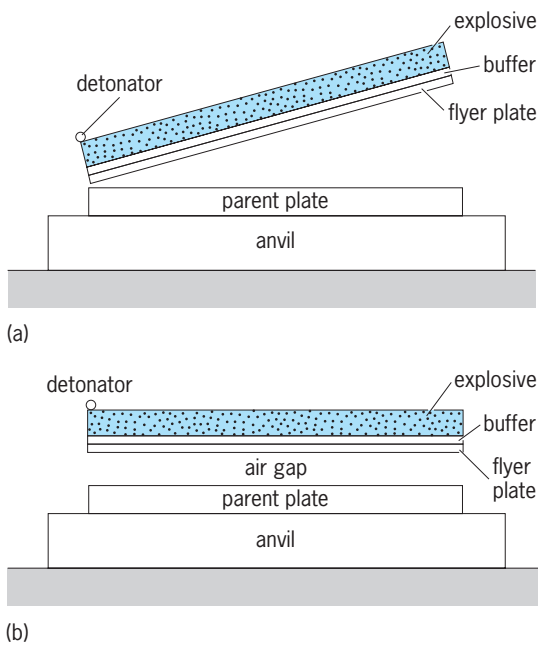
Explosive welding arrangements. (a) Inclined. (b) Parallel.
